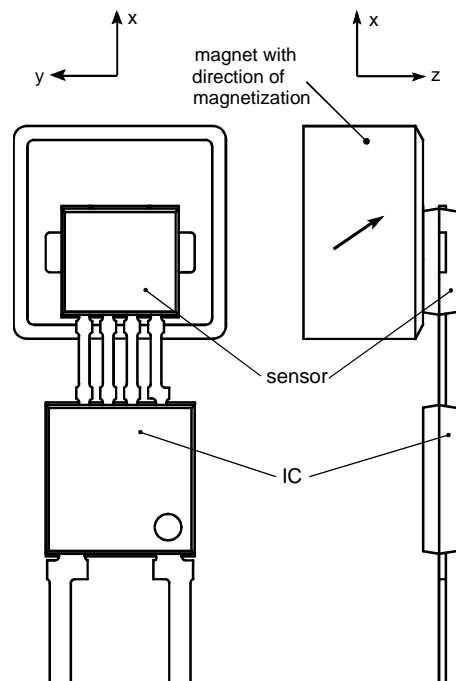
Component detail of the sensor KMI15/1 for passive target wheels
